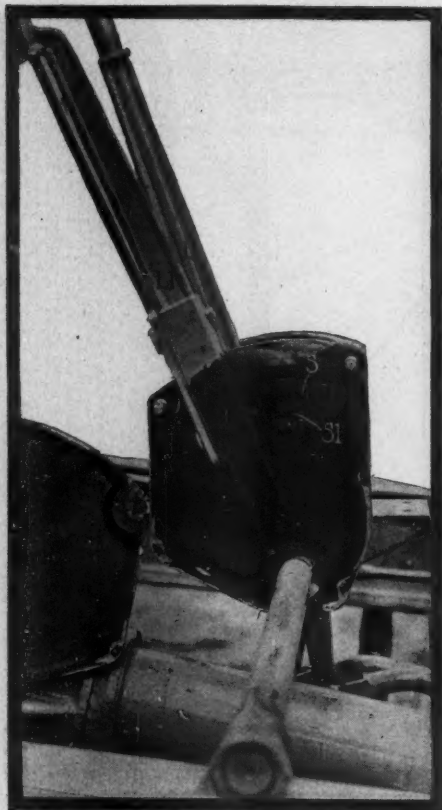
GEARSHIFT SYSTEM ON MODEL 61
